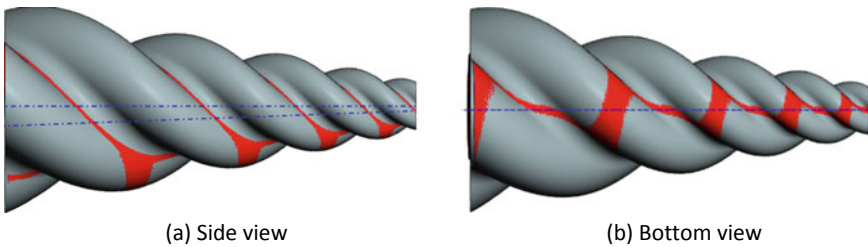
Contact band between inner and outer rotor with enlarged inner rotor surface
